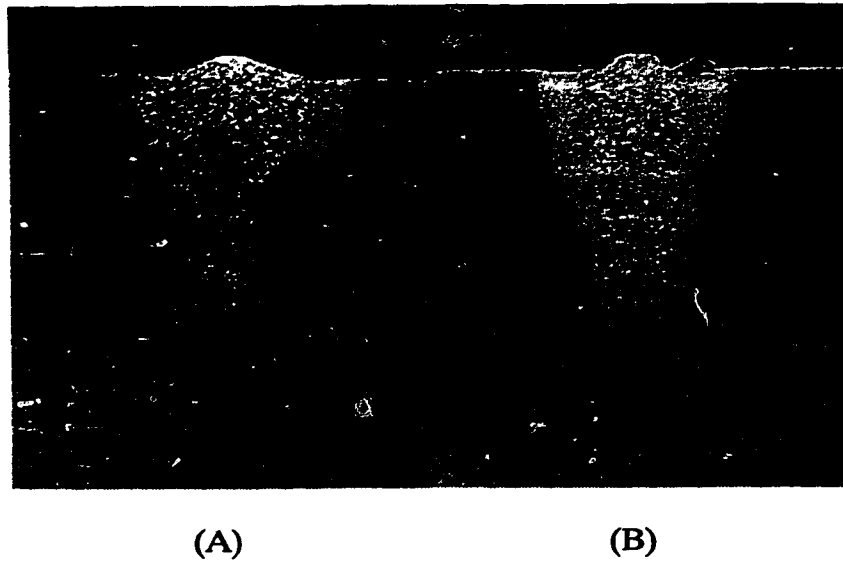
6 kW laser welds, $v = 8\text{mm/sec.}$; (A) CW weld, (B) burst weld with $f_b = 75$ and $N = 13$. Magnification = 4.7x.
